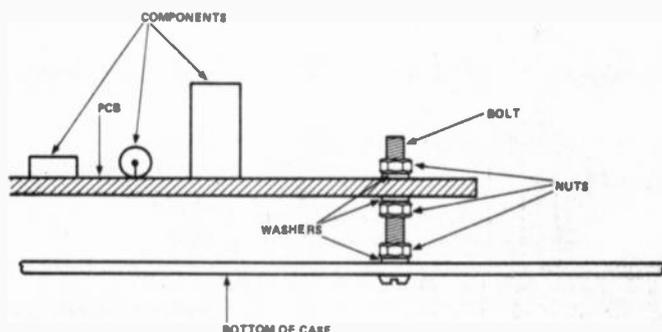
A method of fixing a PCB to a project case, using nuts, washers and bolts
